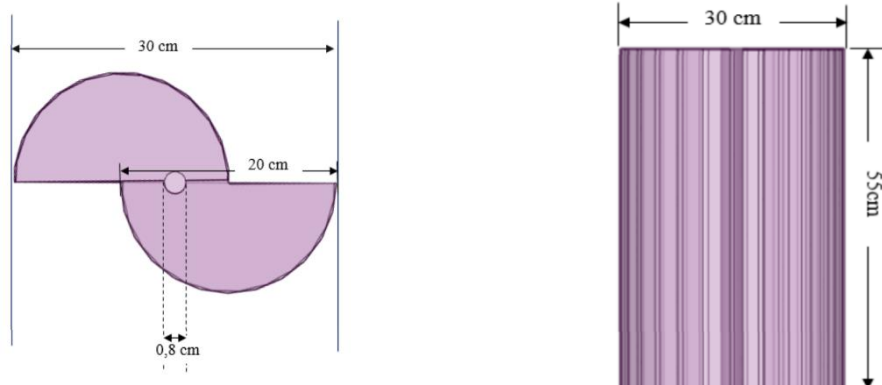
The following is a dimensional framework drawing for a) blade dimensions and b) turbine dimensions.
